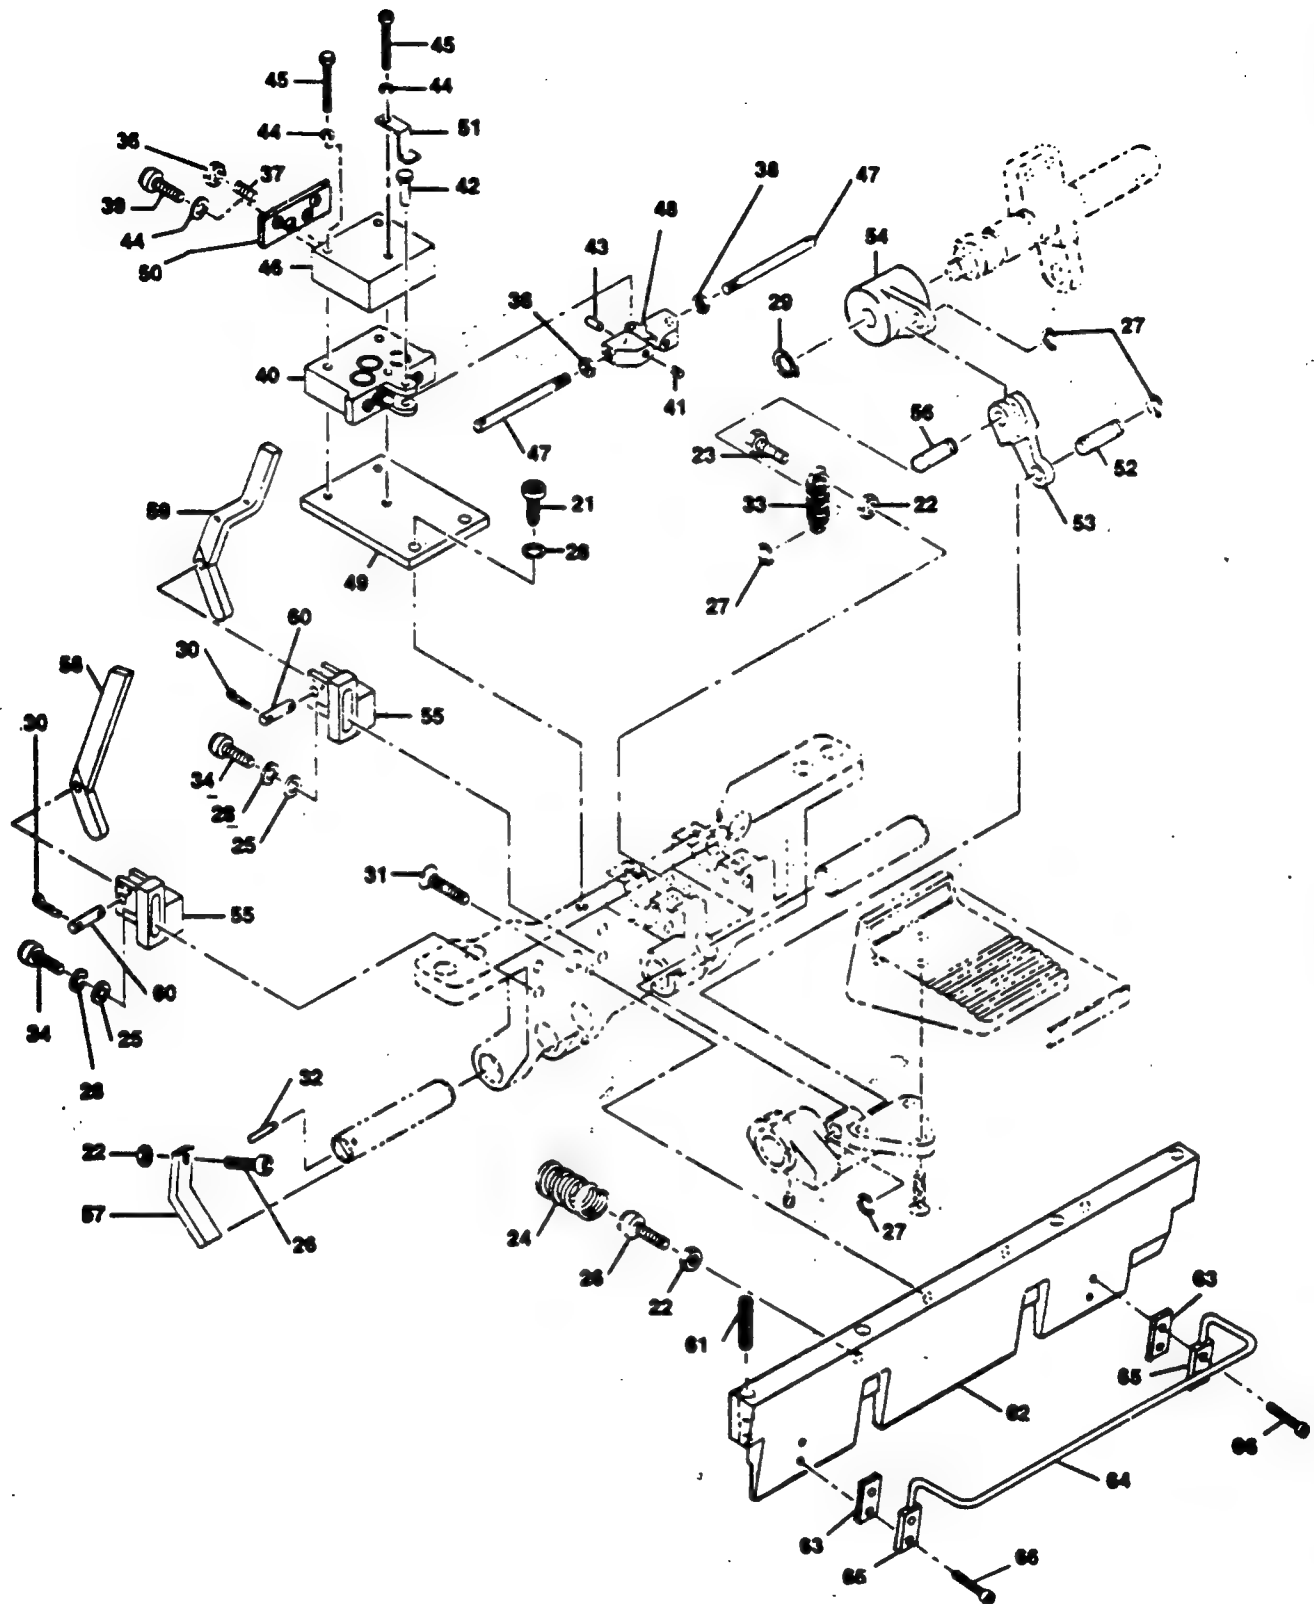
PEDAL ASSEMBLY (Sheet 2 of 2)
